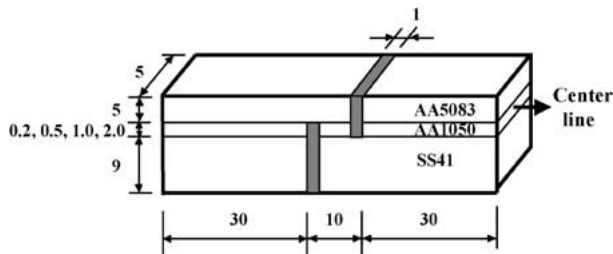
The shape and dimensions (in mm) of shear deformation test specimen.
